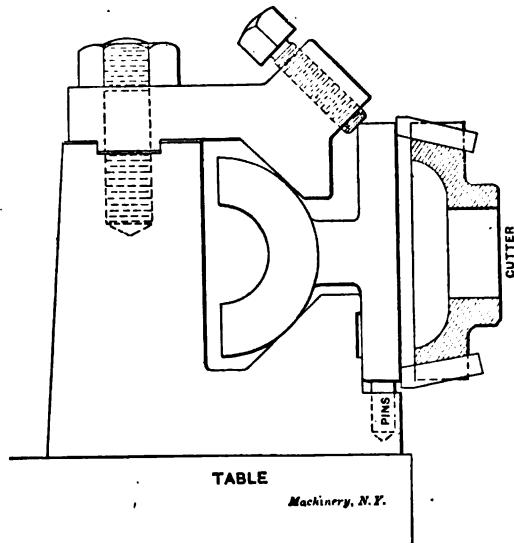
Alternative Method of Holding the Base when Milling the Lower Surface.
